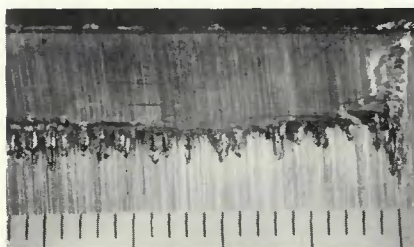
Longitudinal section through weld no. 5 (7075 Al). Rule divisions in millimeters
